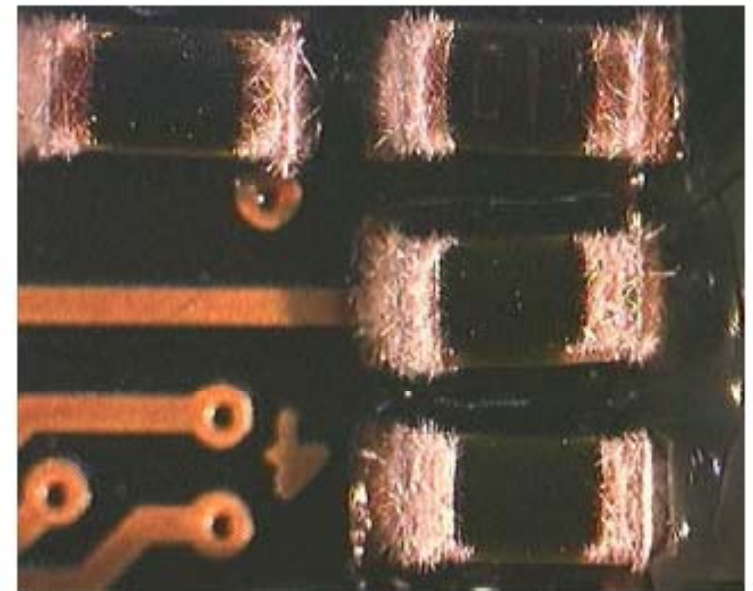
Close-up showing tin whiskers on the solder joints. 40x
